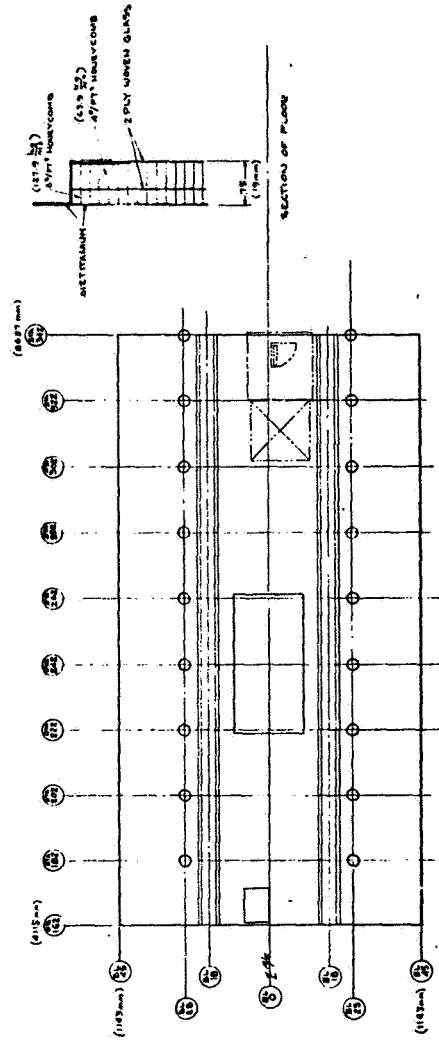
COMPOSITE FLOOR STRUCTURE. TYPICAL FLOOR PANEL.
